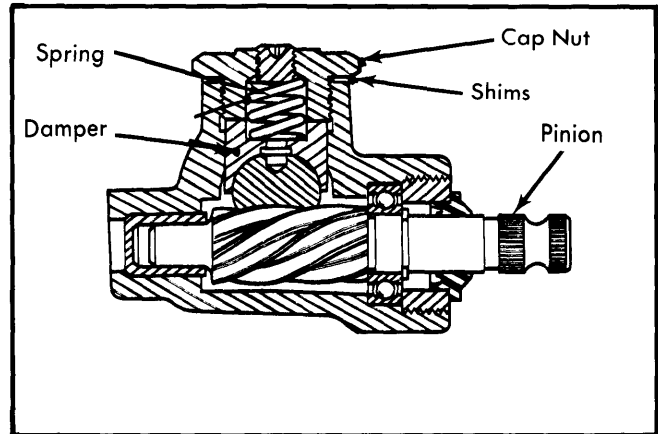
Cross Sectional View of TR7 Pinion with Housing and Rack Damper (Spitfire Similar)
